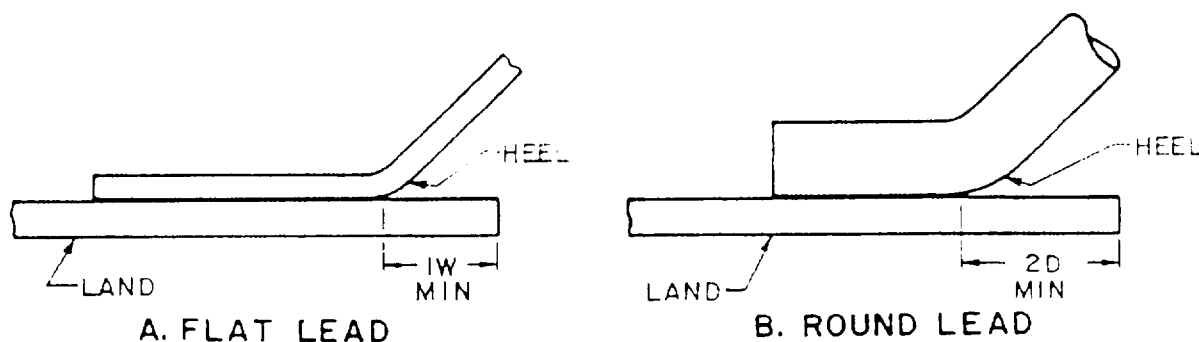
Planar mounted device lead heel clearance (see 4.11.5.8).
